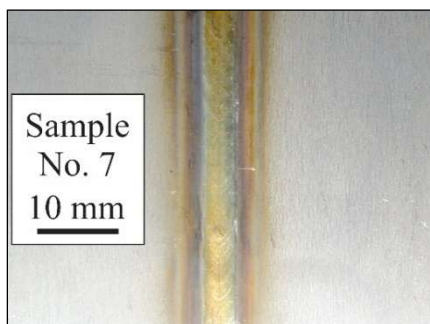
Specimen N° 7 - TAG, 100 A, no filler material
